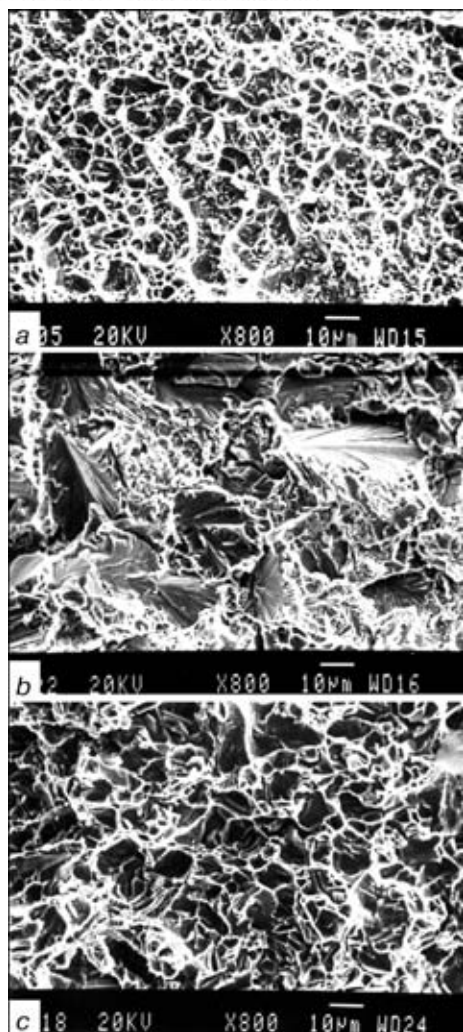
Fractography of fractures of brazed joints in alloy Glidcop Al-25 made by using filler metals No. 3 (a), 4 (b) (see Table 2) and the experimental filler metal (c)
